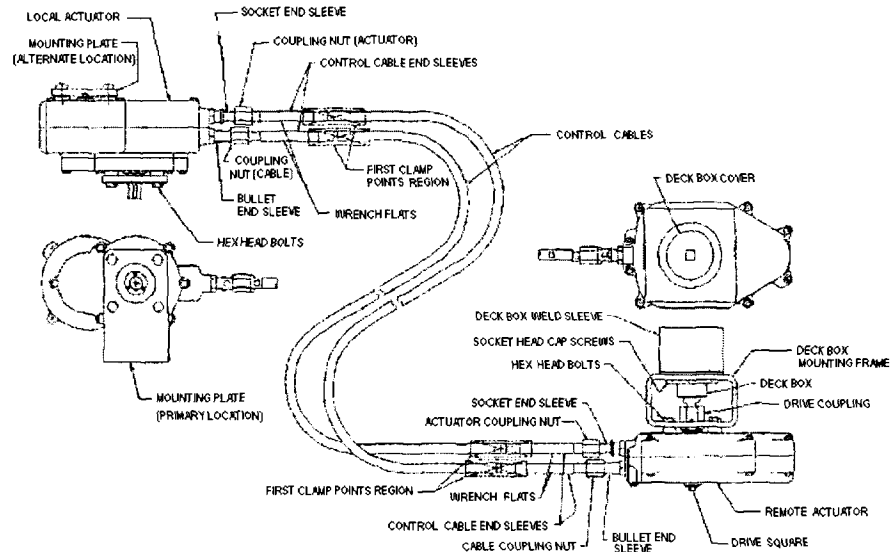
Multi-Turn Ball Bearing Remote Valve Operating Sys
